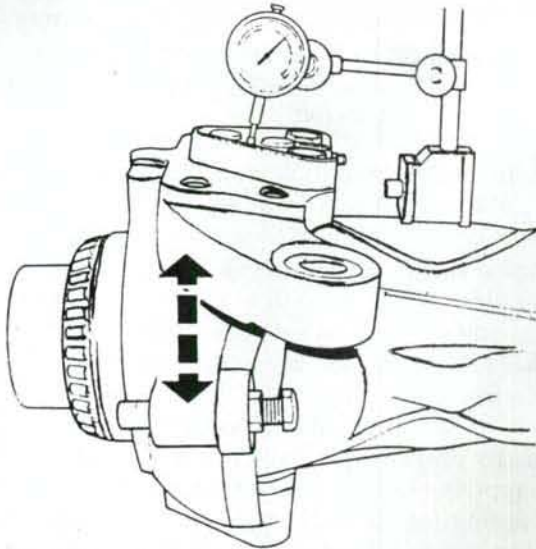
Adjust the king pin bearings to obtain free play of 0-0.10 mm (0-0.004 in.). Refer to text.
